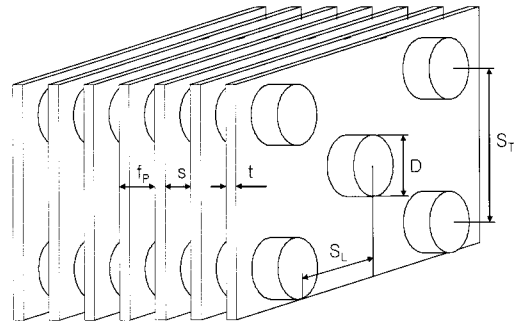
Schematic drawing of the heat exchanger with circular tubes and plate fins
